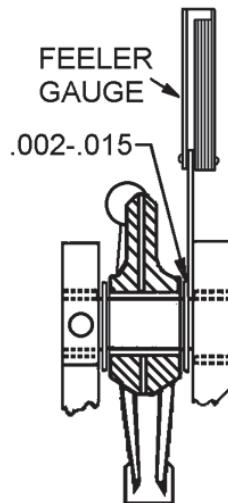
Updraft Cylinder Rocker Arm Side Clearance
